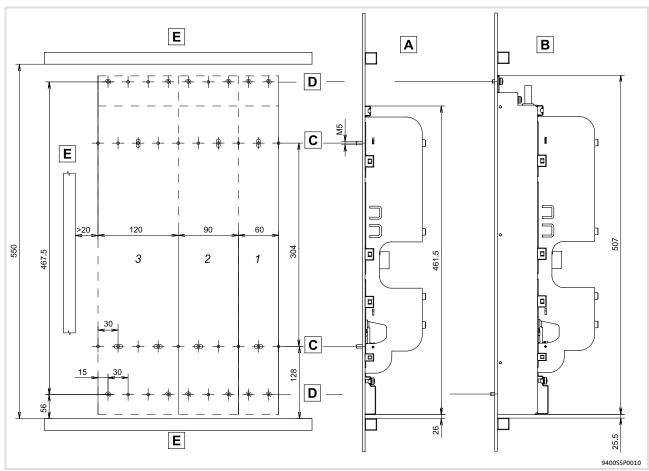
Mounting grid for installation backplane and filter of device sizes 1 ... 3
